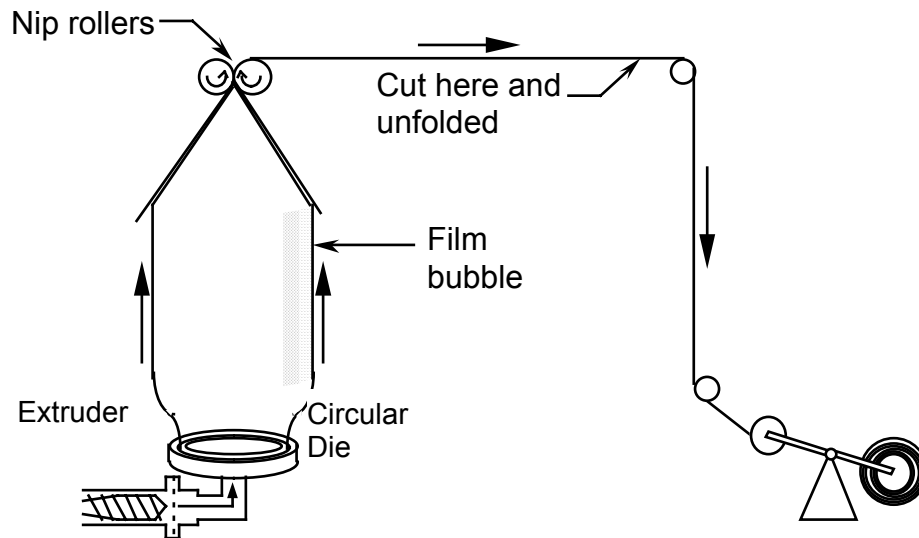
Blow film extrusion process used to manufacture PE GMs.
